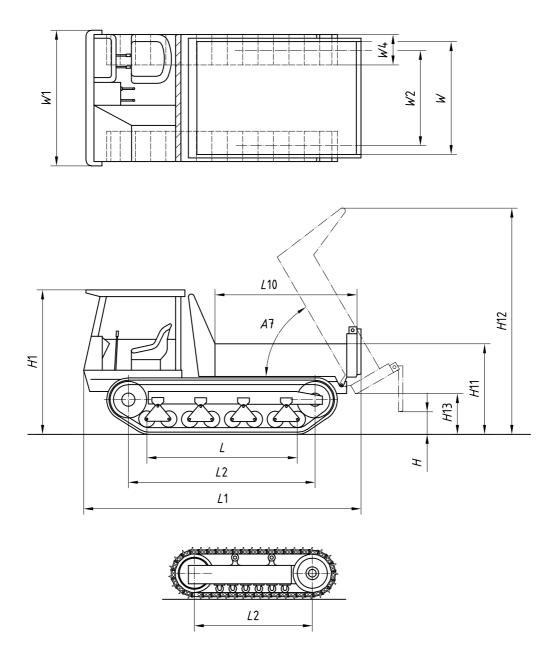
Dimensions of crawler compact dumper — Front operator position
